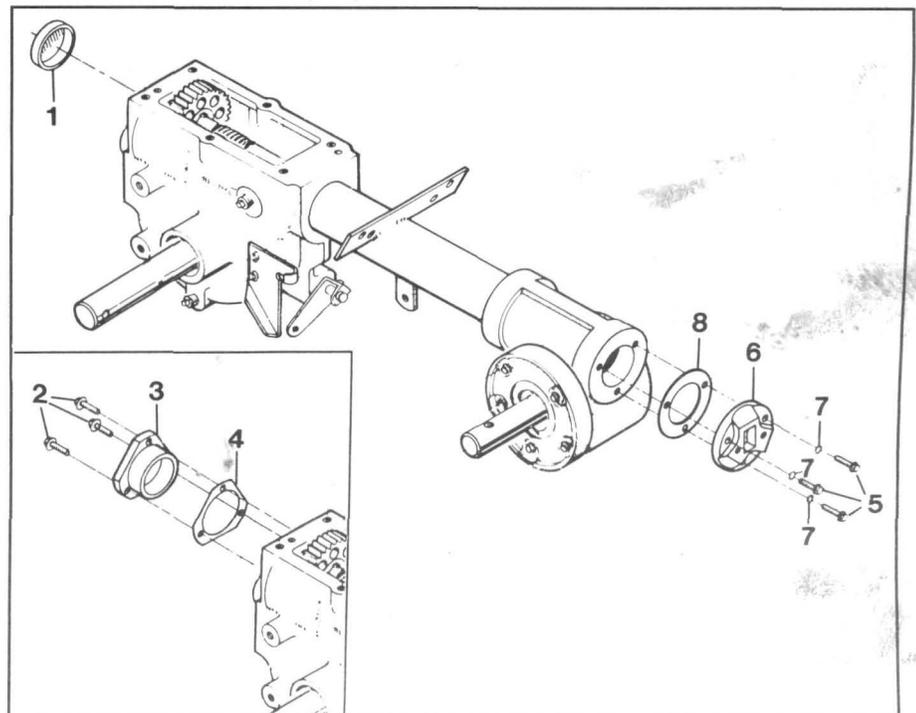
Remove these parts prior to removing the drive shaft assembly (Econo-Horse and Pony transmission housing shown).
